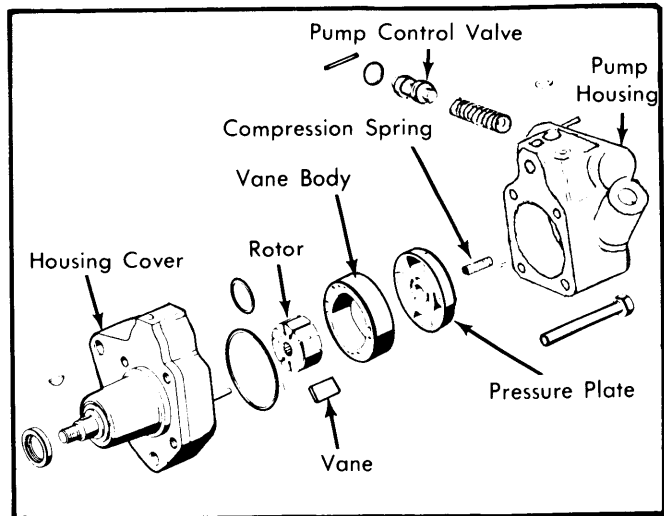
Exploded View of Power Steering Pump (VT 27 Shown)
